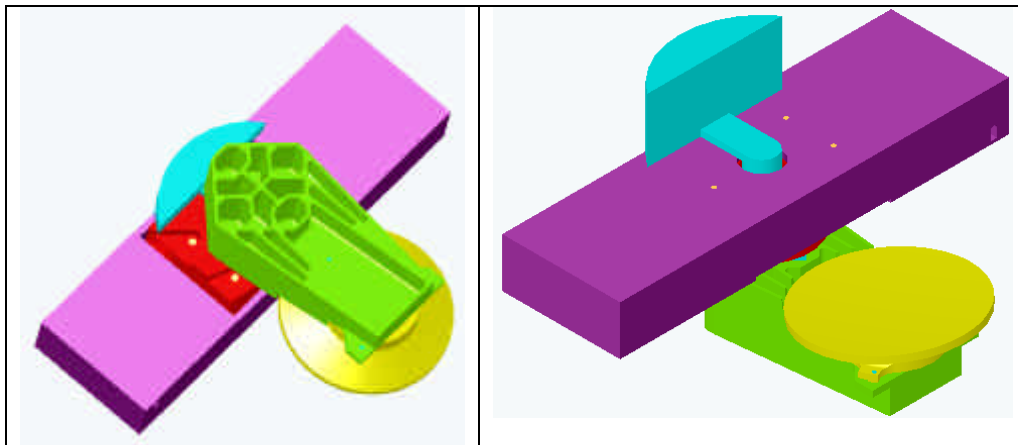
Mirror assembly. The cradle (purple) holds the rotation stage (red), which holds the arm (green), the collimator (yellow), and the counter-weight (cyan).
